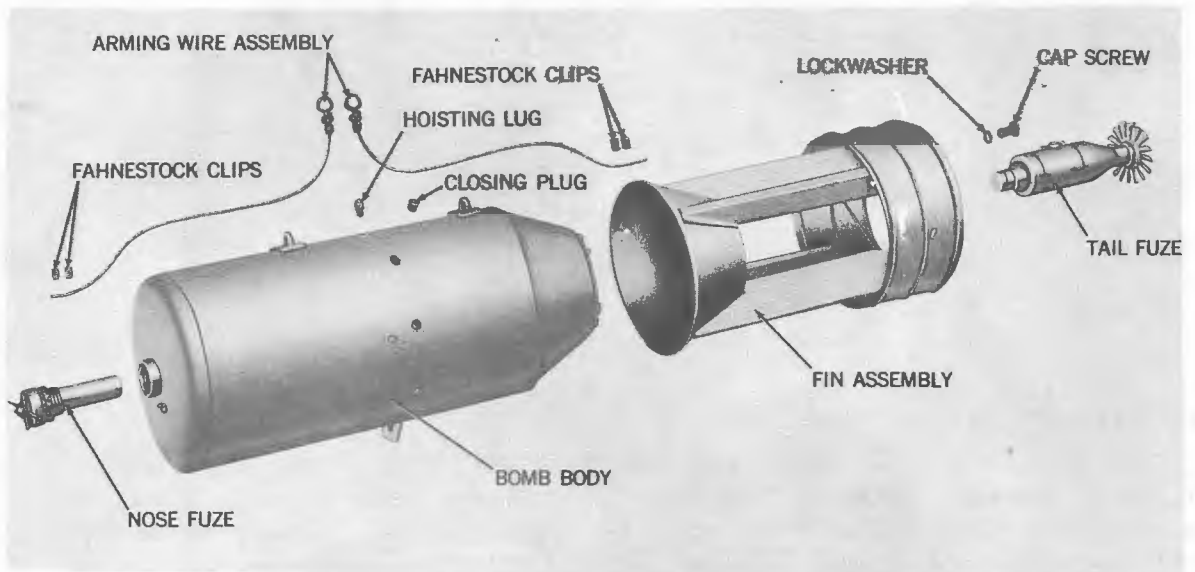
350-lb Aircraft Depth Bomb AN-Mk 54 Mod 1, Exploded View.
